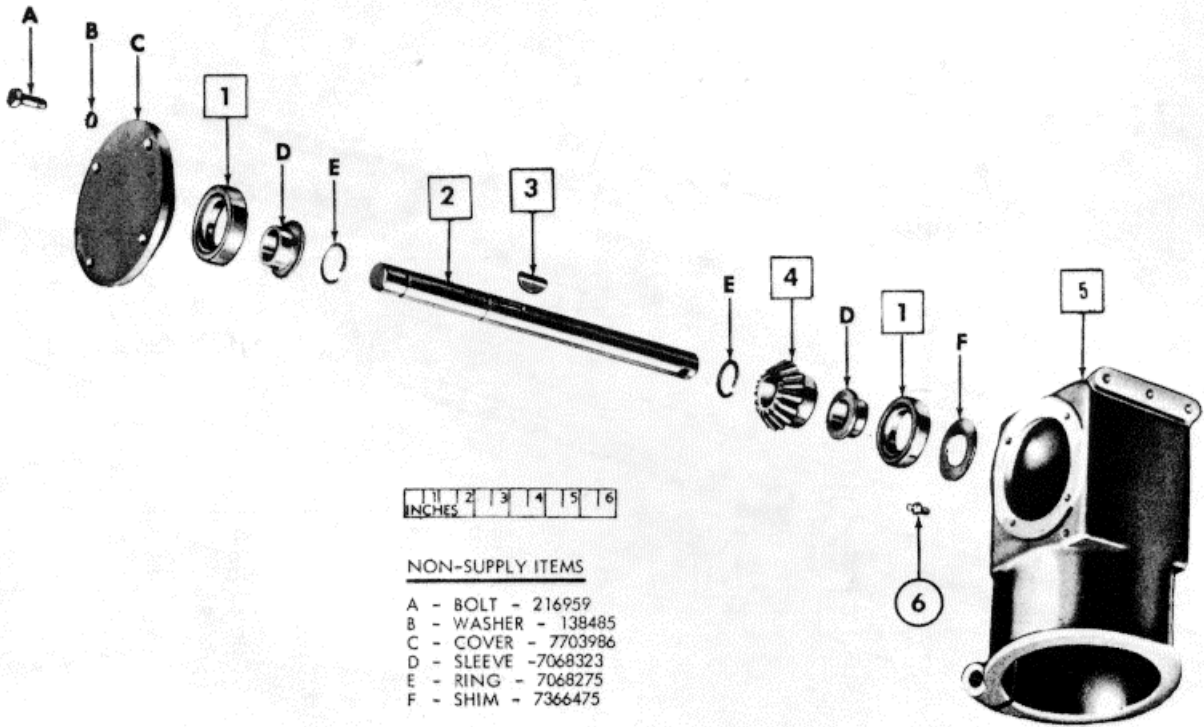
LEFT LANDING GEAR LEG GEAR BOX-EXPLODED VIEW
